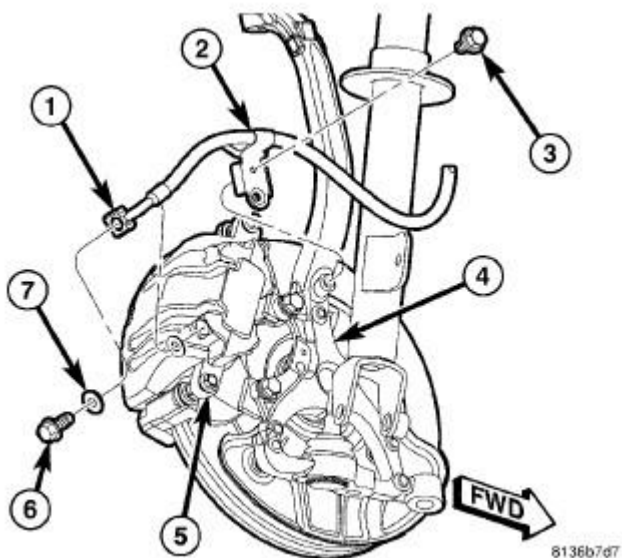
FRONT BRAKE FLEX HOSE AT CALIPER
